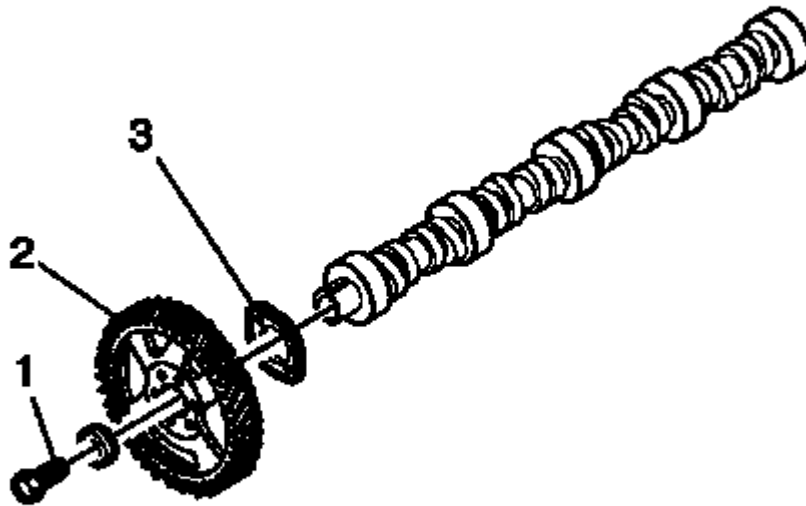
View Of Camshaft, Camshaft Gear & Camshaft Thrust Plate
